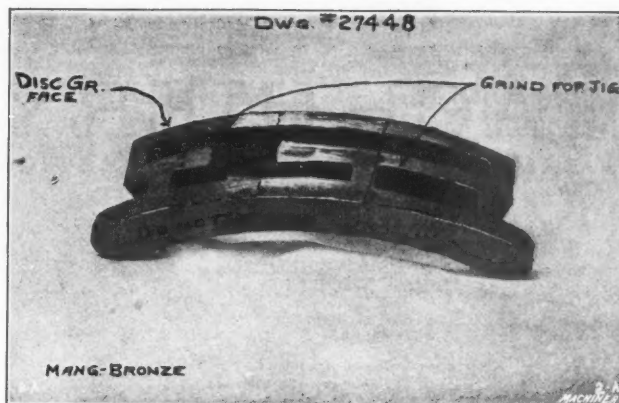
Surfaces subsequently machined, which are ground to meet the Requirements of the Jig
